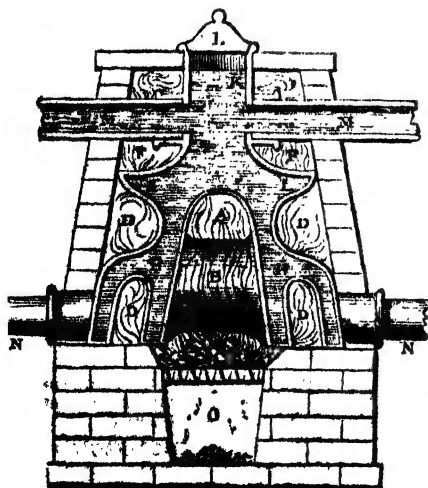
is the elevation of the front. Fig. 2 a transverse section across the boiler and furnace. Fig. 3 a longitudinal section through the centre; and Fig. 4 a plan of the furnace and lower part of the boiler. The same letters refer to similar parts in each figure.
